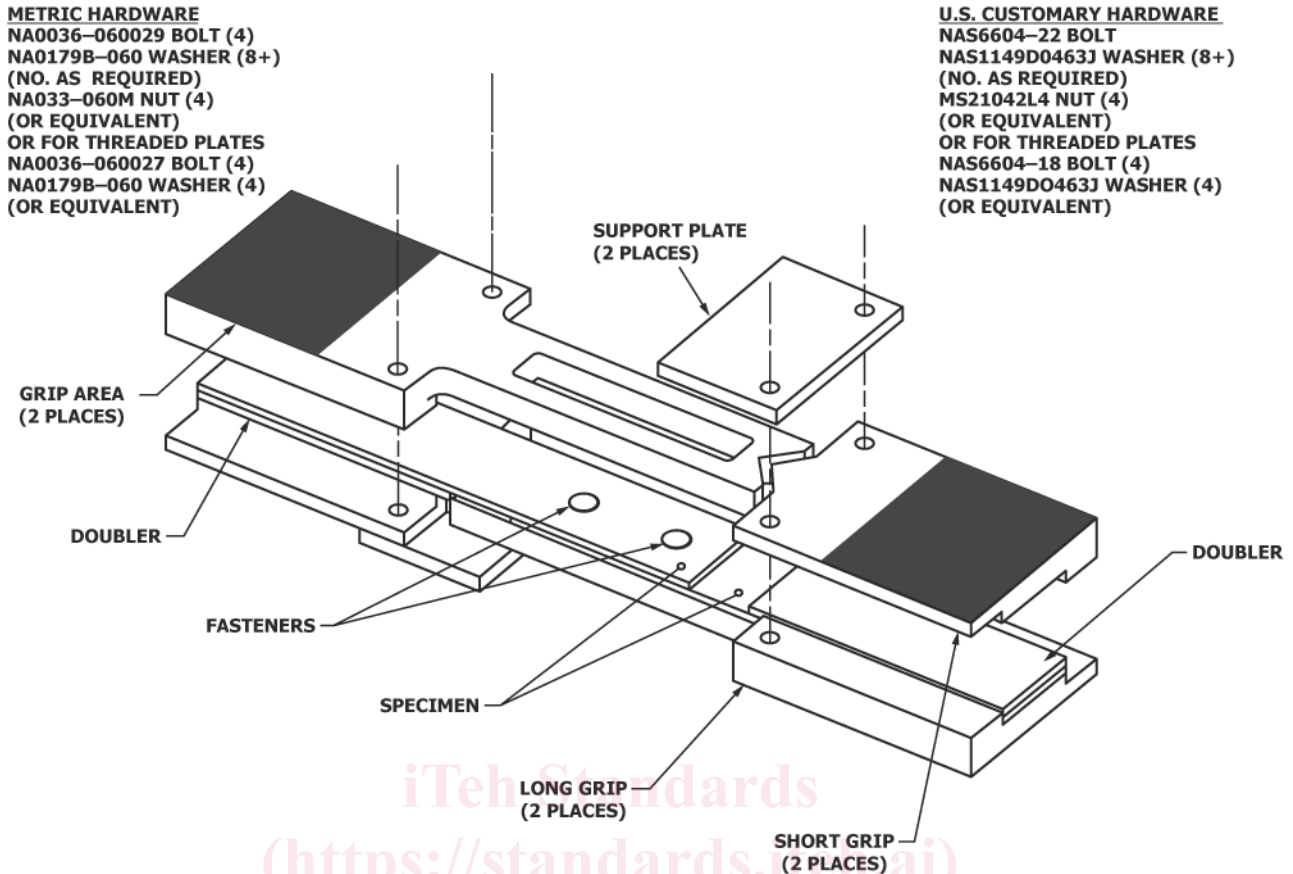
Support Fixture Assembly (for Details of the Support Fixture, See Test Method D5961/D5961M)
